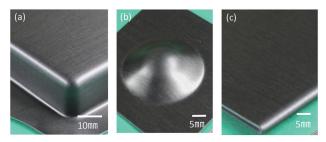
Example of processing FeLuce[™] Black (a) Drawing a rectangular shell, (b) Bulging, (c) Hemming
